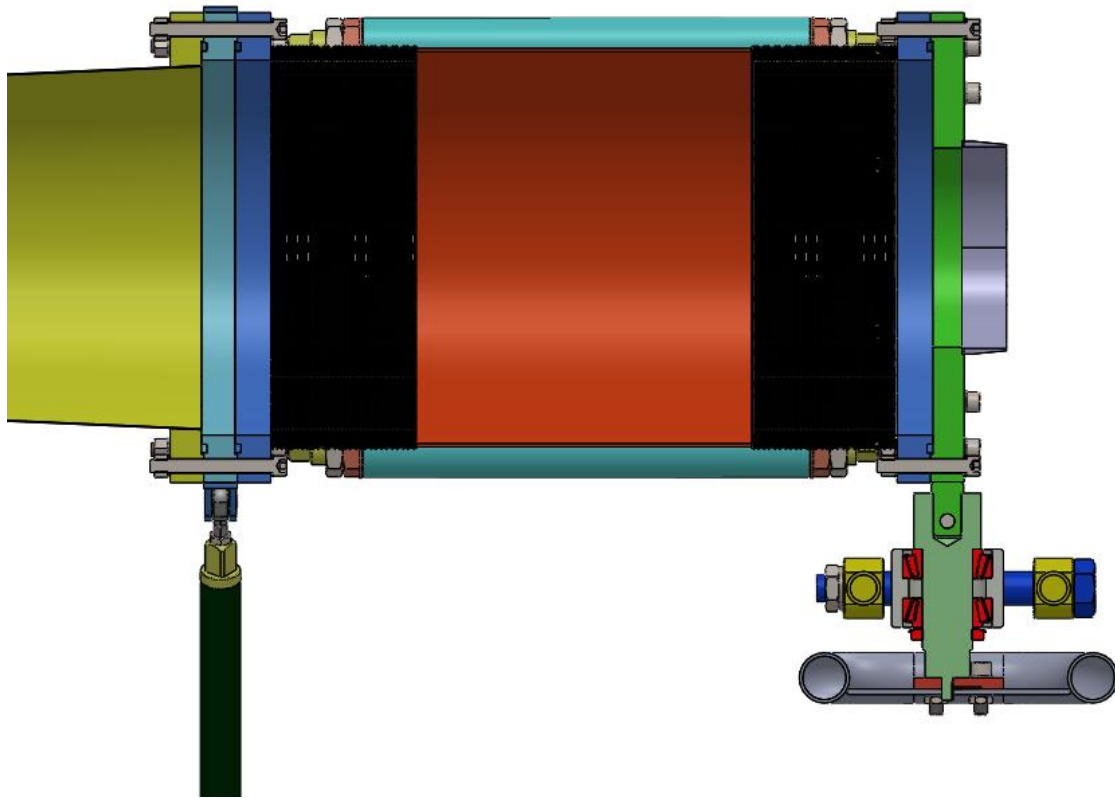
Cut view through bellows weldment and kinematic mechanism
